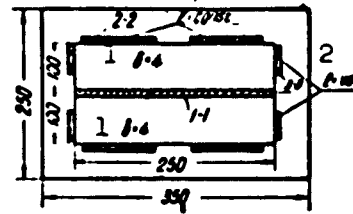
Specimen used to determine crack resistance; different rigidities obtained by varying size of side tack welds. 1) $b = 4$.
